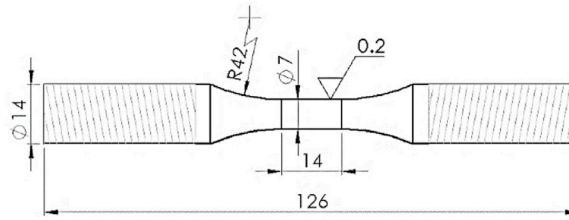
The geometry of uniaxial fatigue test specimens, dimensions in mm.
